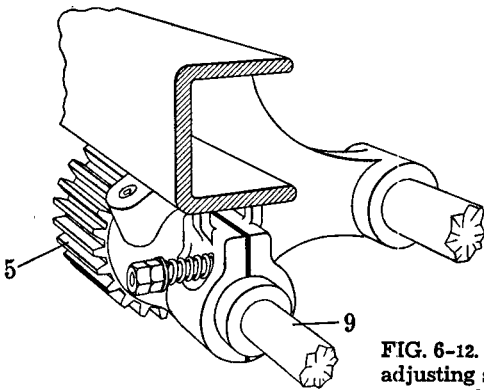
View showing the mold disk brake with adjusting screw for holding the same for clamping it upon the shaft. The object of this brake is to
